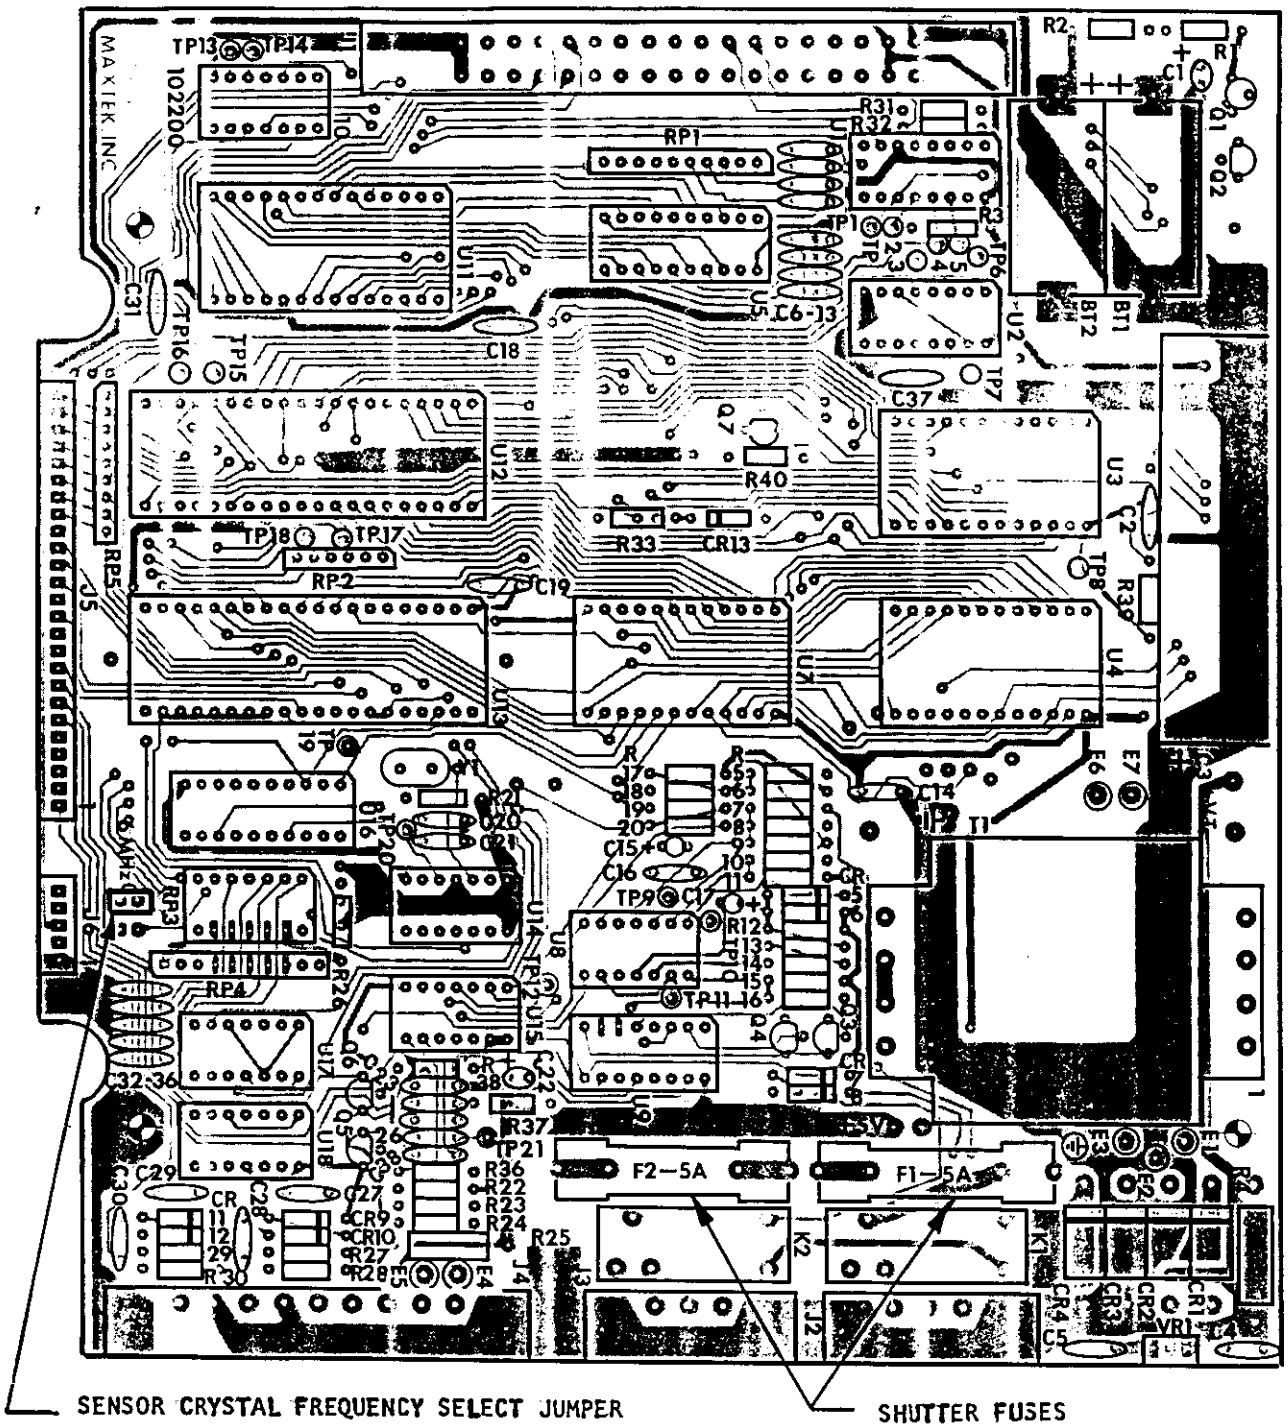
PRINTED WIRING BOARD ASSEMBLY DRAWING
